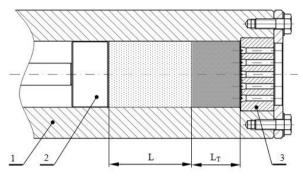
Crank press system of dry ice compression/extrusion machine, 1 - compression cylinder, 2 - ram, 3 - extrusion die with multiple extrusion channels, L - new feed length, $L_T -$ pre-feed length.
